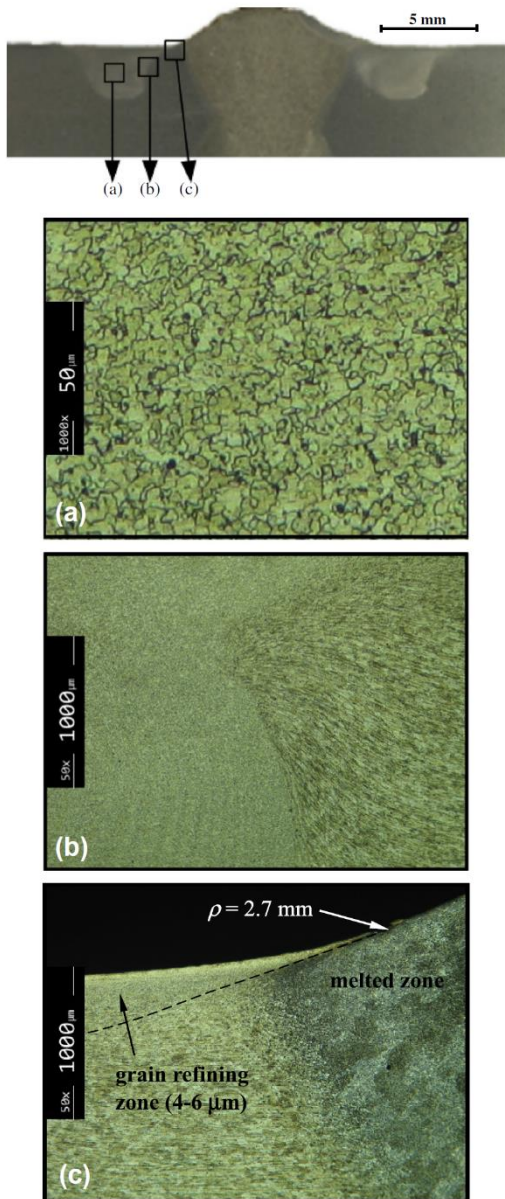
Metallographic analysis of post processed MIG welds: (a) nugget zone; (b) weld toe; and (c) thermo-mechanically affected zone.
